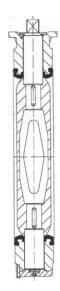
A lined wafer-style butterfly valve Courtesy of AMRI Inc
